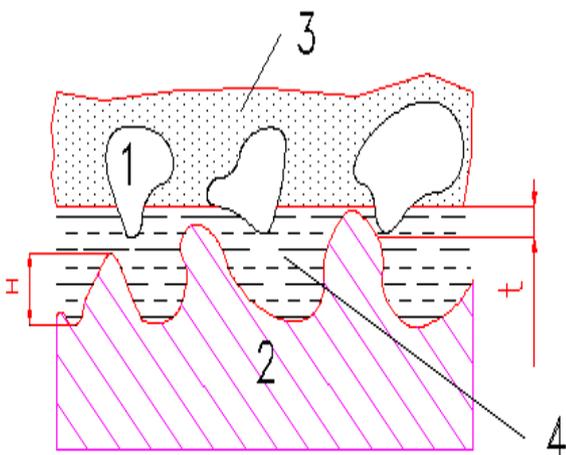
Contact between the abrasive bar and workpiece. 1-abrasive grains ; 2-piece; 3-bar abrasive; 4-lubricating agent
